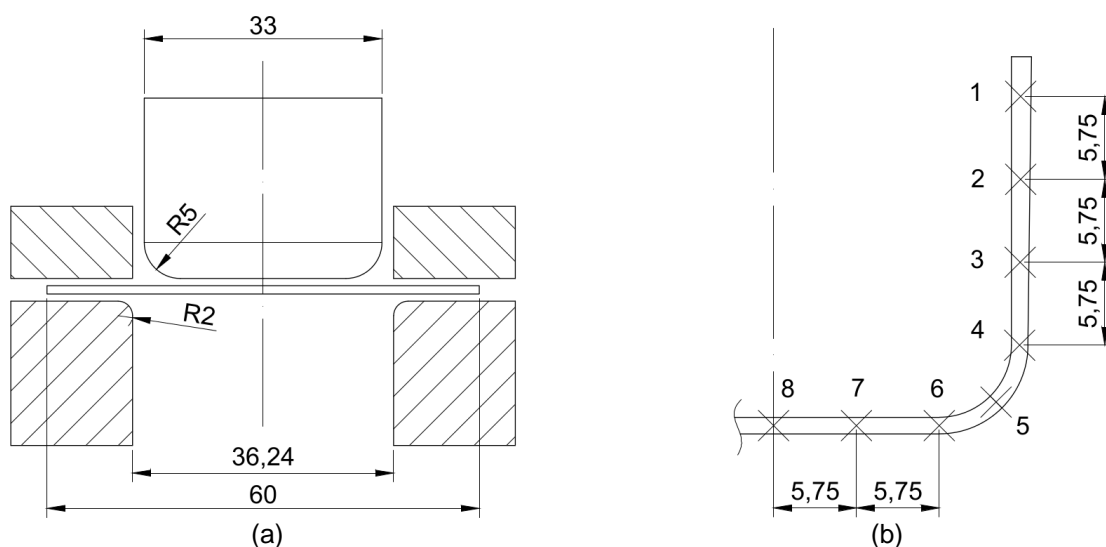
a) cup draw tooling geometry and b) Vickers hardness measurement points.
